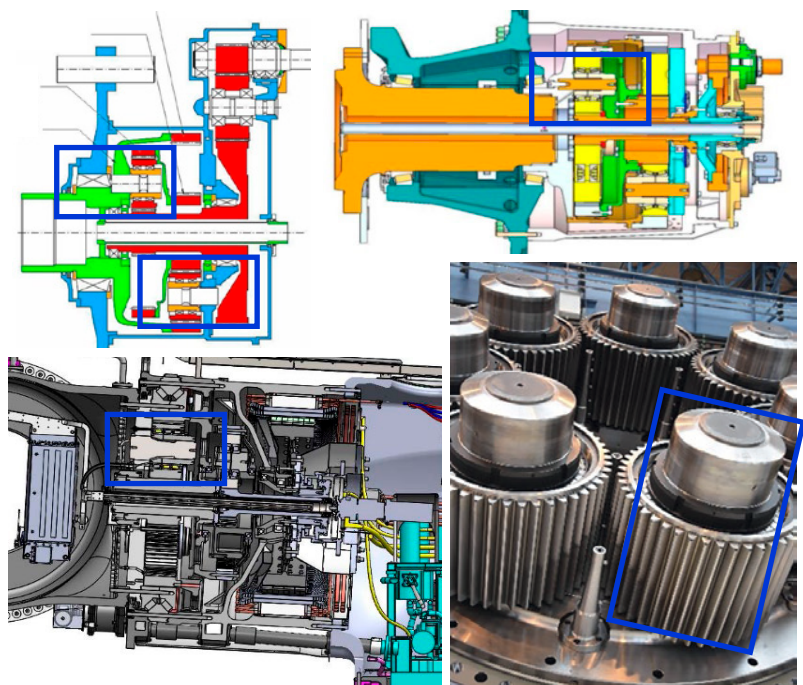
Top left: Gearbox design by MAAG (Ref. 17), believed to be the first wind turbine MGB featuring Flexpins. Top right: Design of a wind turbine MGB using Flexpins, having a compound planetary arrangement (sun gear of second stage connects to the ring gear of first stage (Ref. 19). Bottom left: SCD gearbox designed by the author (Ref. 9). Bottom right: Planetary stage with seven planets, 7 MW wind turbine MGB by WIKOV (Ref. 18). Flexpin highlighted in cross-sectional images.
